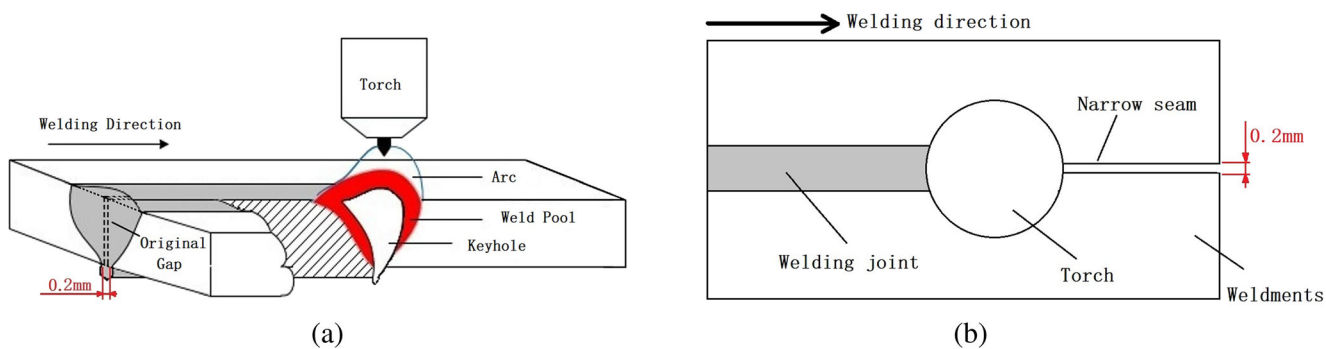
Schematic diagram of the K-TIG welding process: a cross-section of the process; b top view of the process
